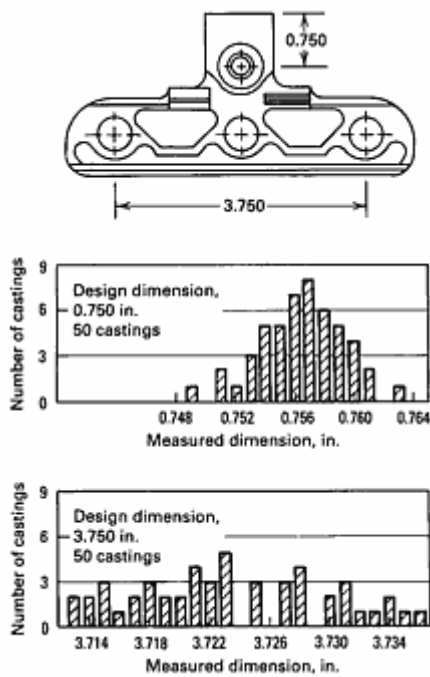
Variations from design dimensions for a typical red brass casting. Parts were cast in green sand molds made using the same pattern. All dimensions are given in inches.
